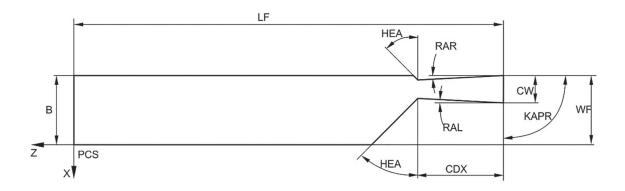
Sketch of turning tool No. 7 (grooving and cut-off design)
